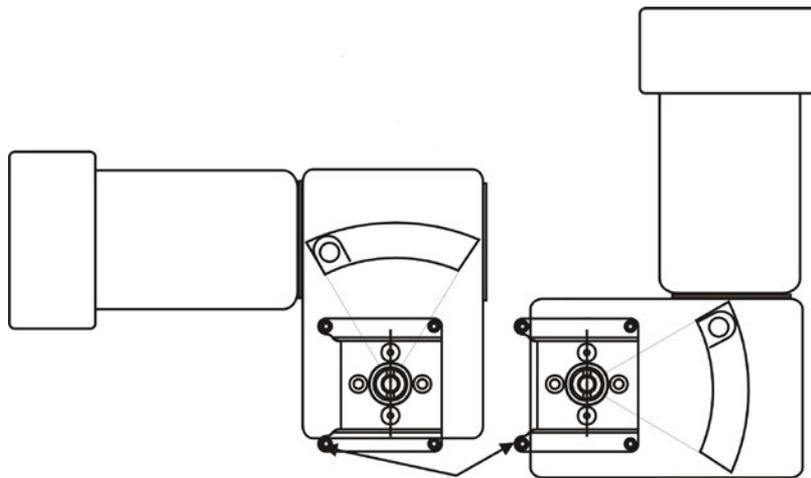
Camflex Air-To-Open Mounting (Front View)
